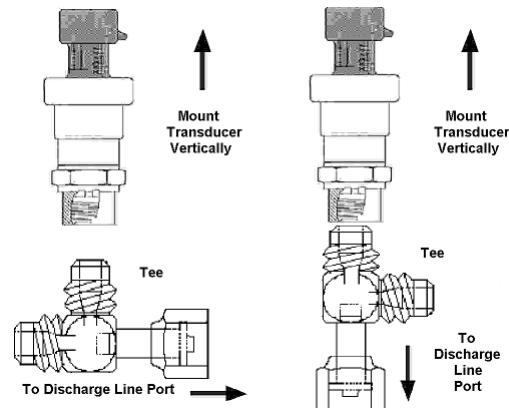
P399 PRESSURE TRANSDUCER MOUNTING
